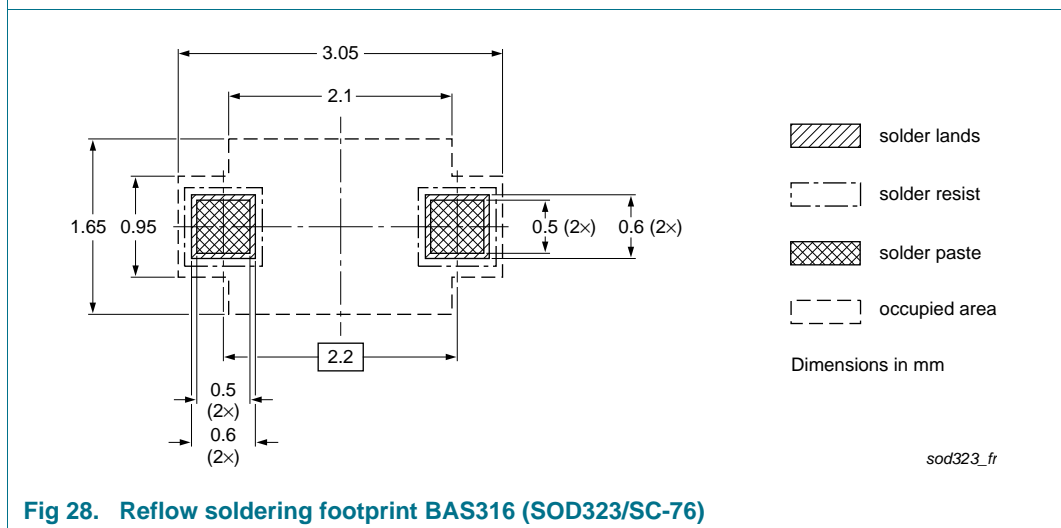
Reflow soldering footprint BAS316 (SOD323/SC-76)
